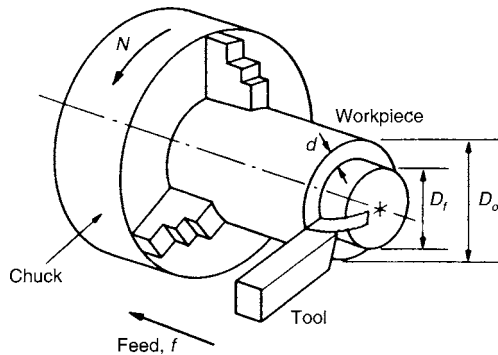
A turning operation on a round workpiece held in a three-jaw chuck.
